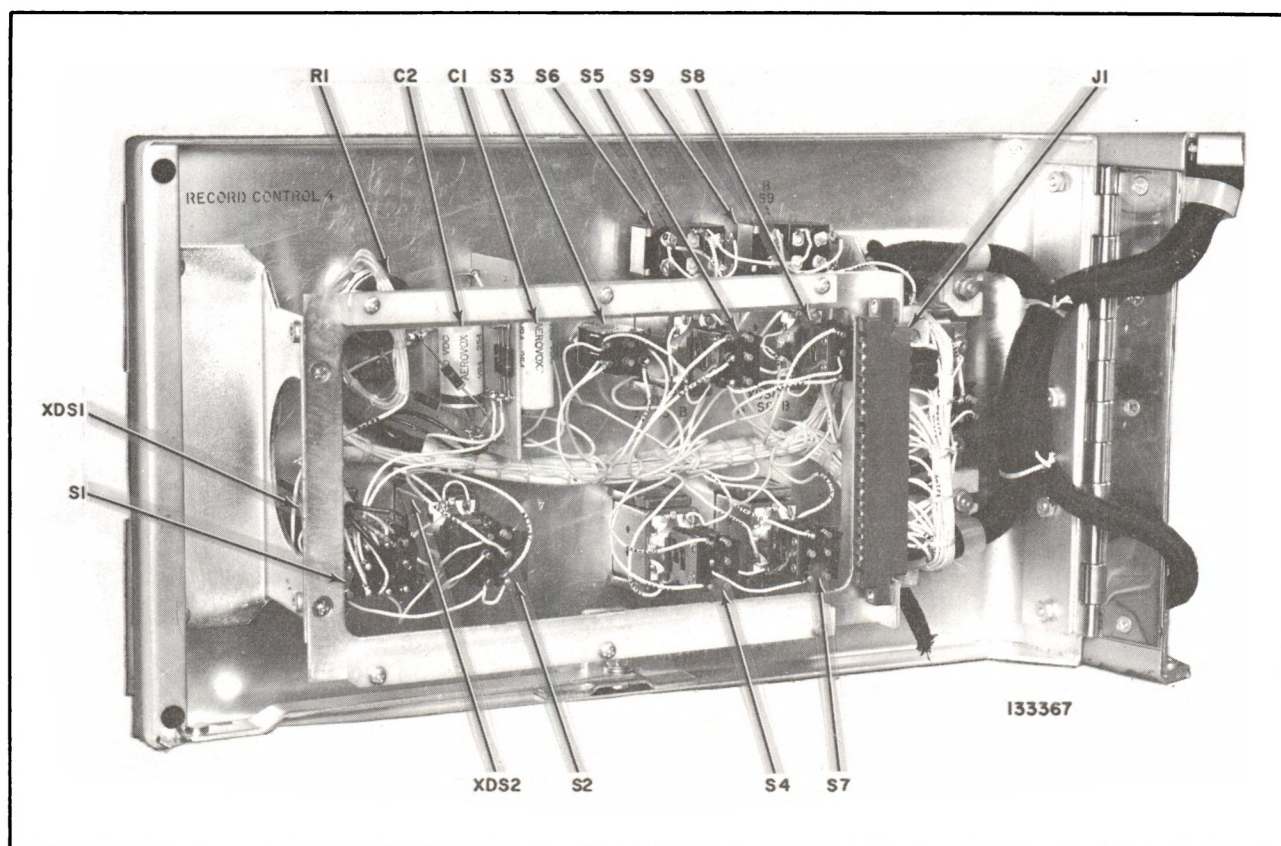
Record Control Panel (4), opened, showing Switches and Controls
